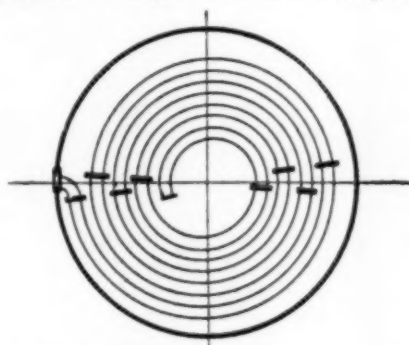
COIL VACUUM PAN, SINGLE COIL
